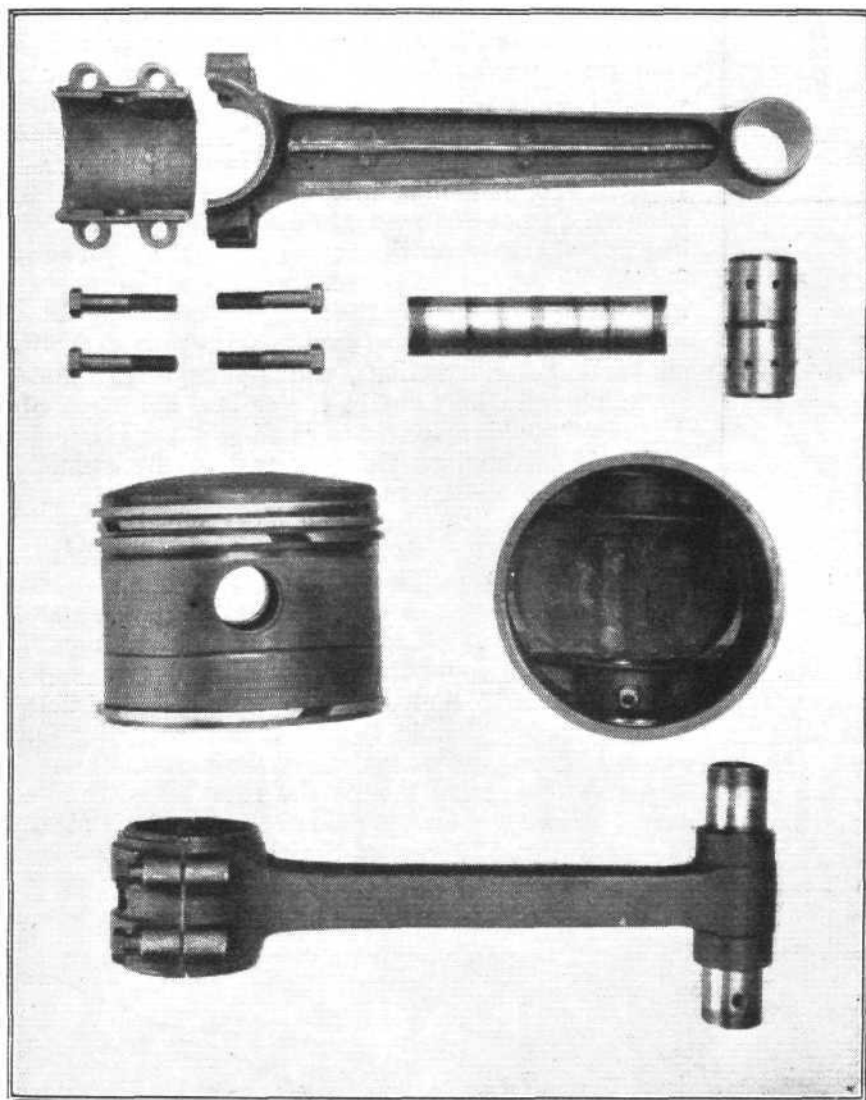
Connecting rod, piston, gudgeon pin and bush.
